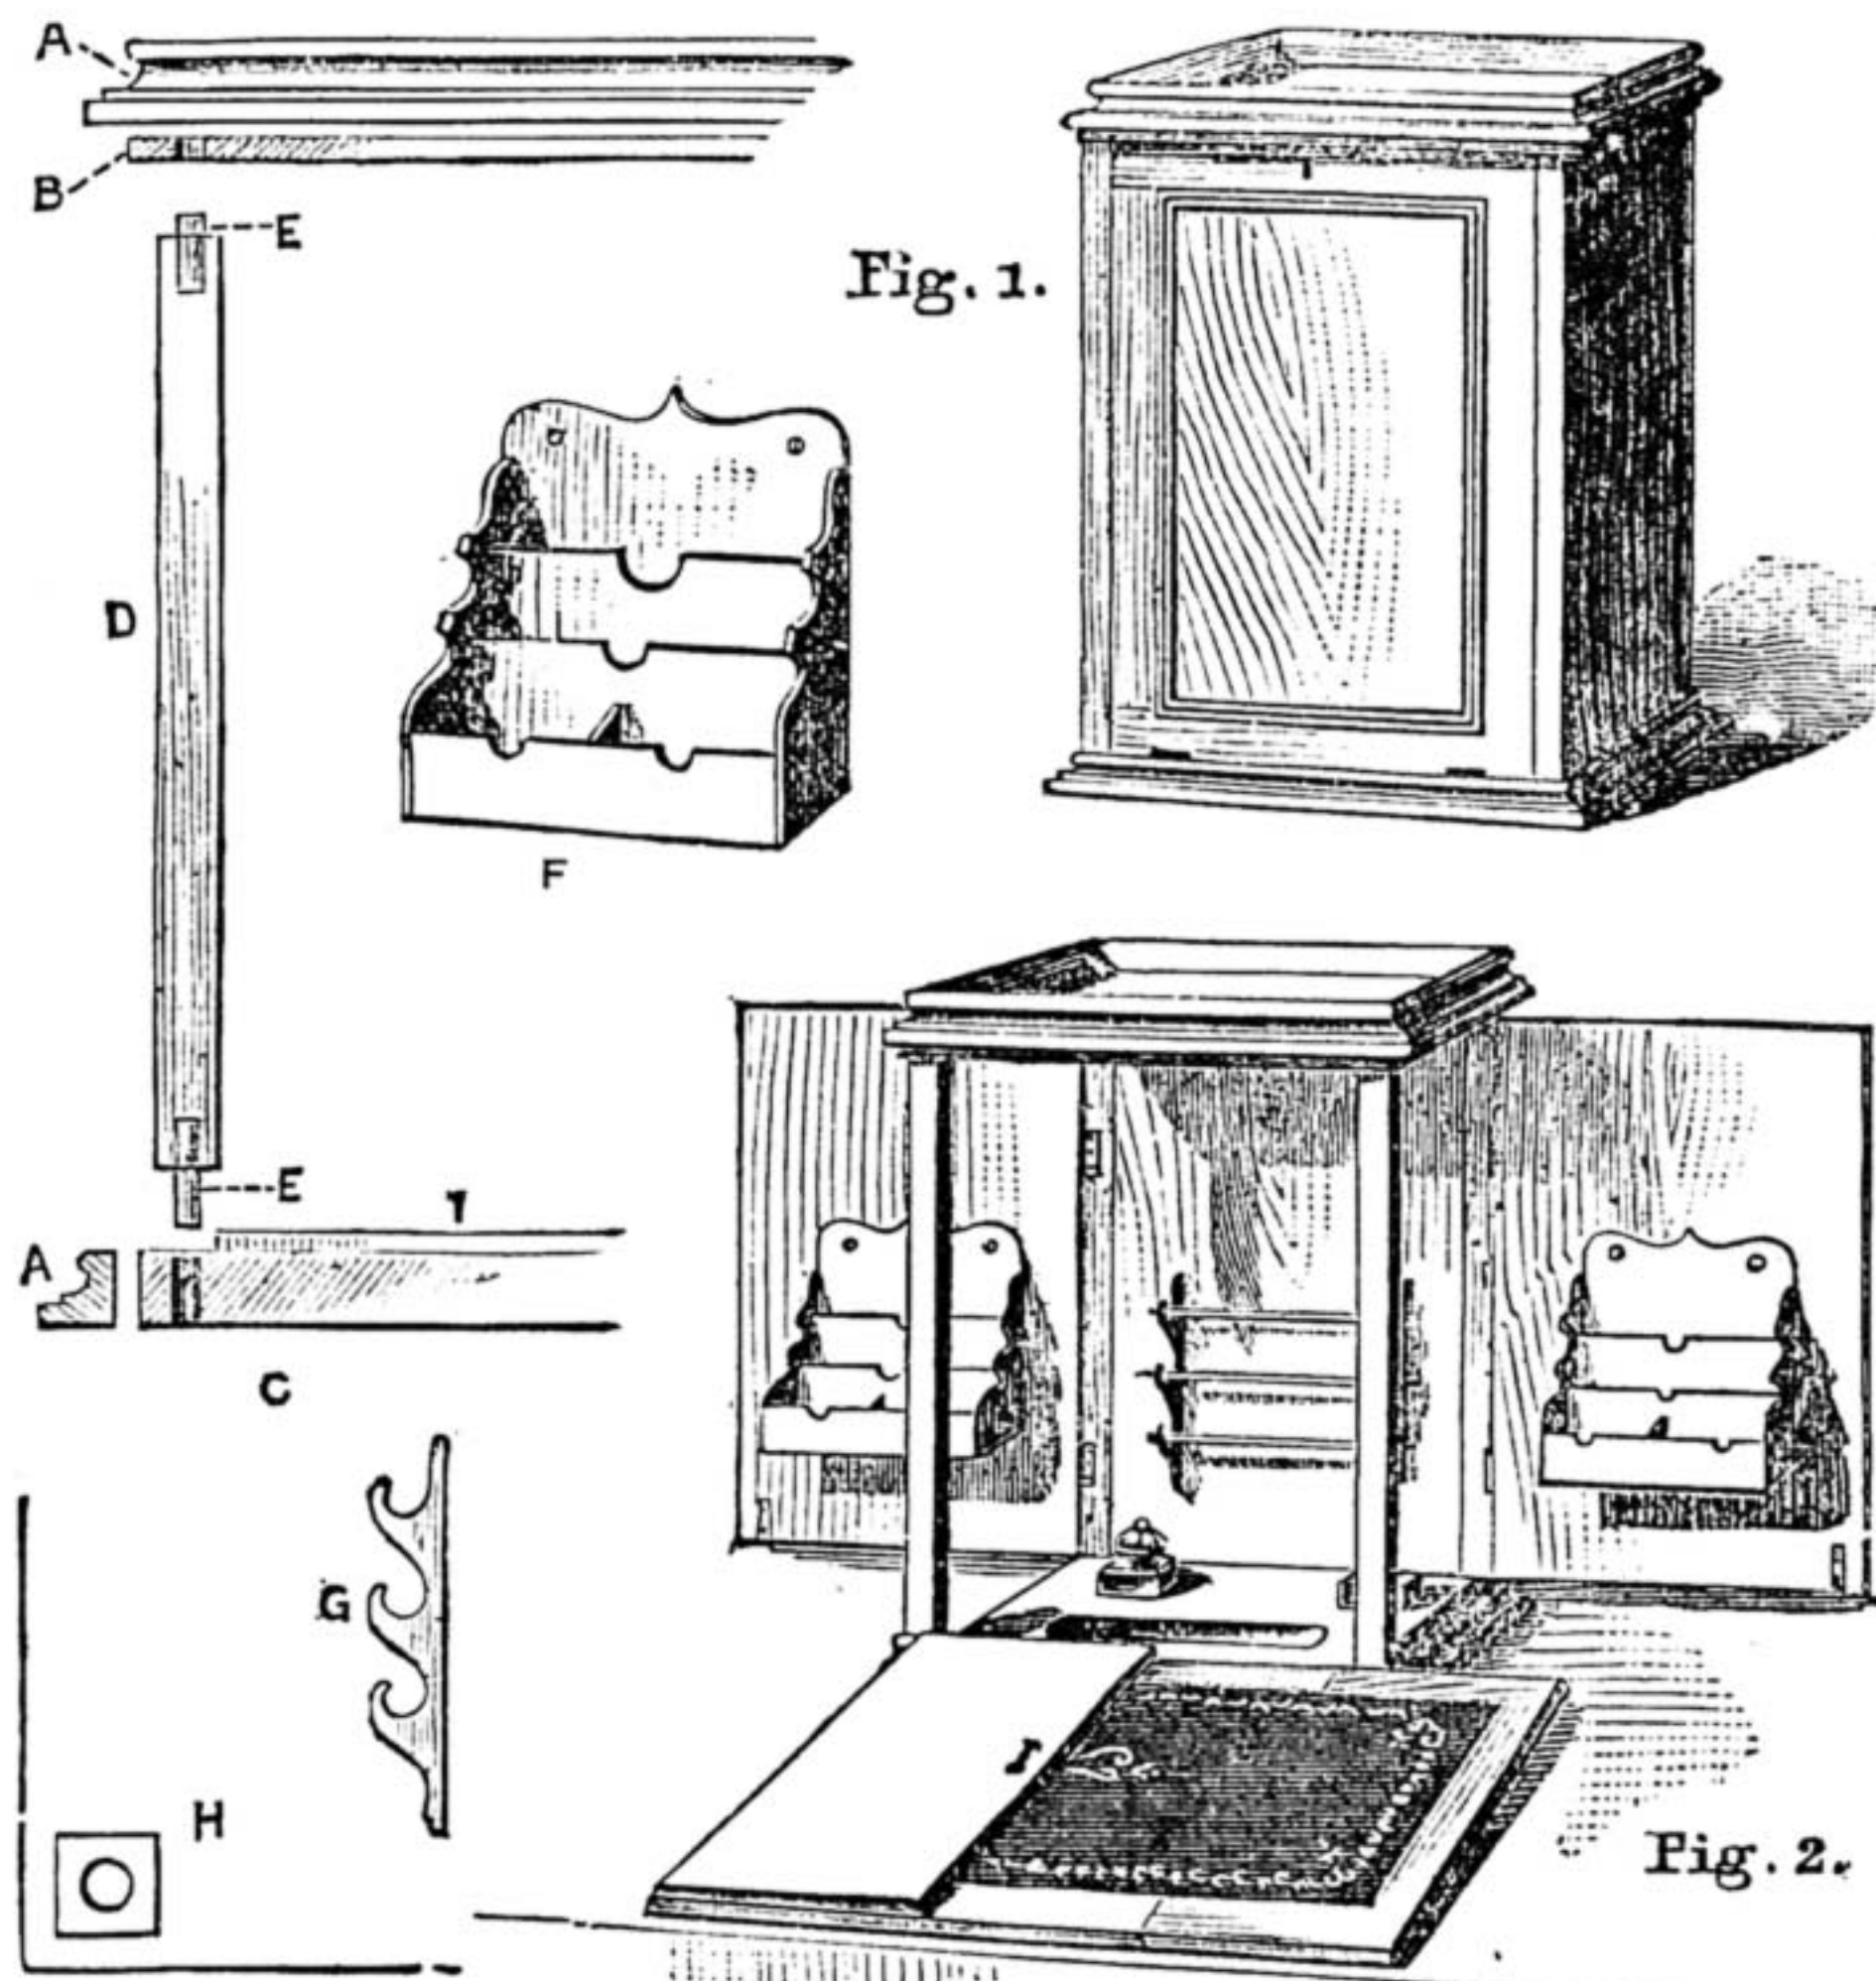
Simple Writing Cabinet, closed. Fig. 2.—Cabinet open—A, Moulding; B, Top Board; C, Bottom Board; D, Upright; E, Dowel Pin; F, Stationery Box; G, Pen Rack; H, Plan of Sockets for Dowel Pins.
